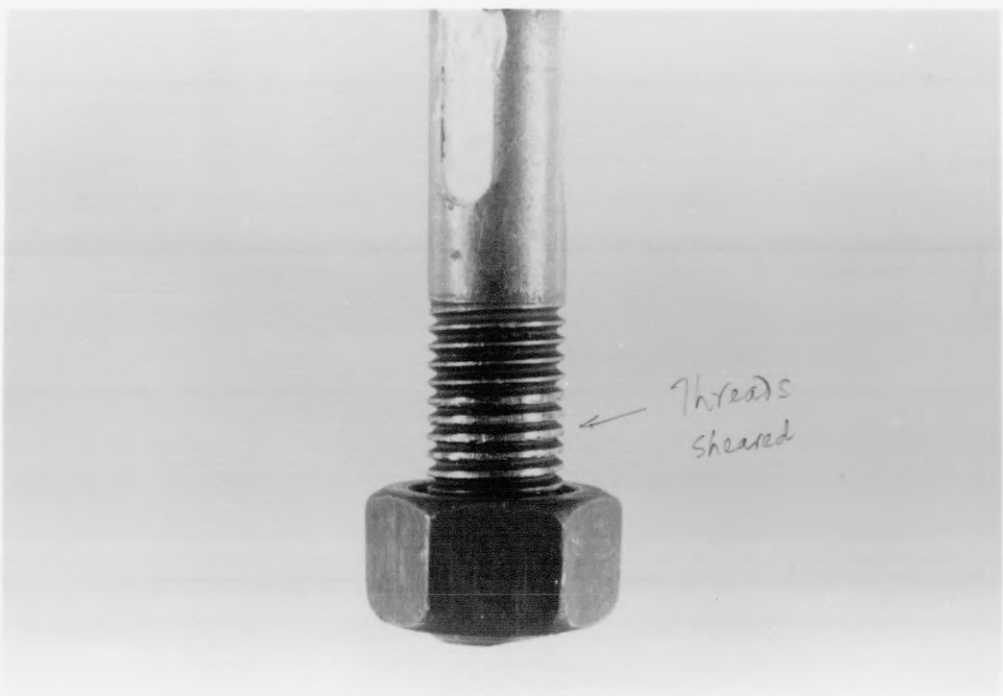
Sheared threads of M20 grade 8.8 bolts
